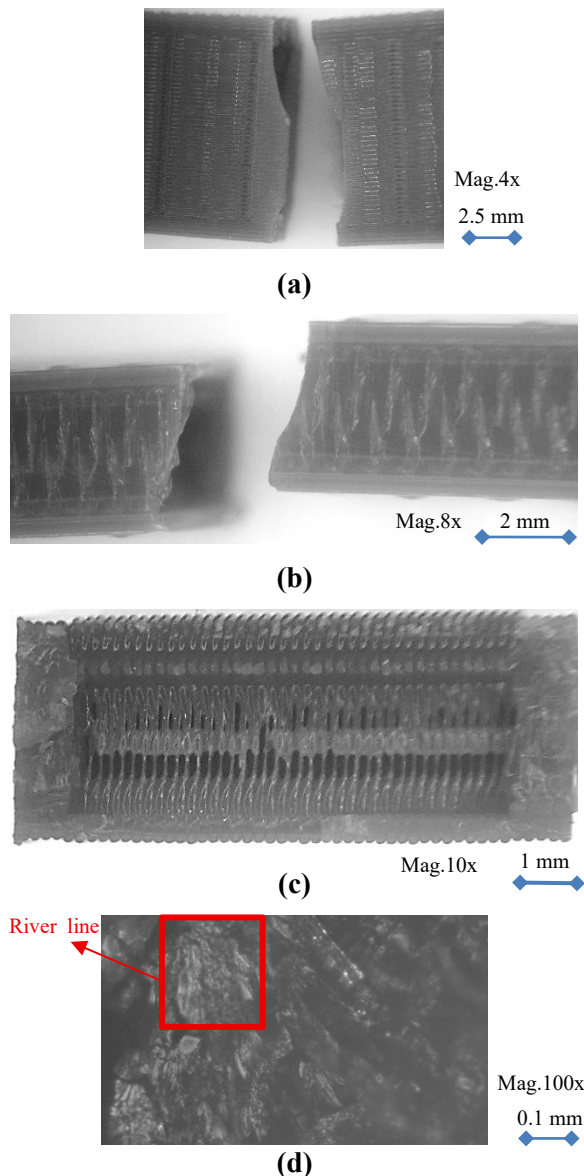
Fracture surface morphology of the lowest impact strength specimen.
